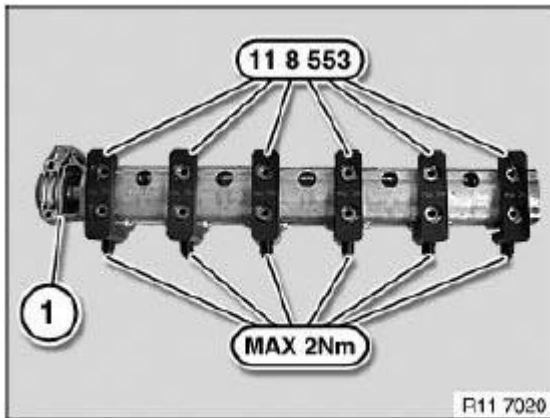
Identifying Upper And Lower Bearing Strips With Special Tools 11 8 553
